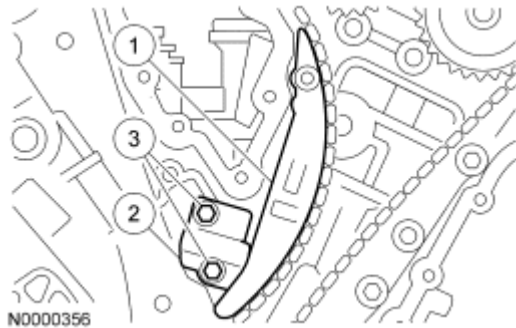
Identifying Timing Chain Tensioner Arm & Bolts
